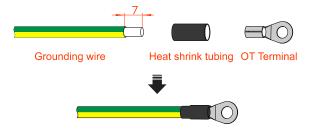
Stripping diagram of external grounding wire (unit: mm)
